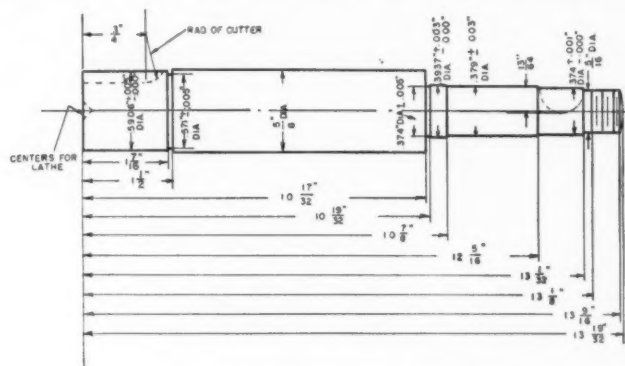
A PRACTICABLE METHOD FOR DIMENSIONING A SHAFT
